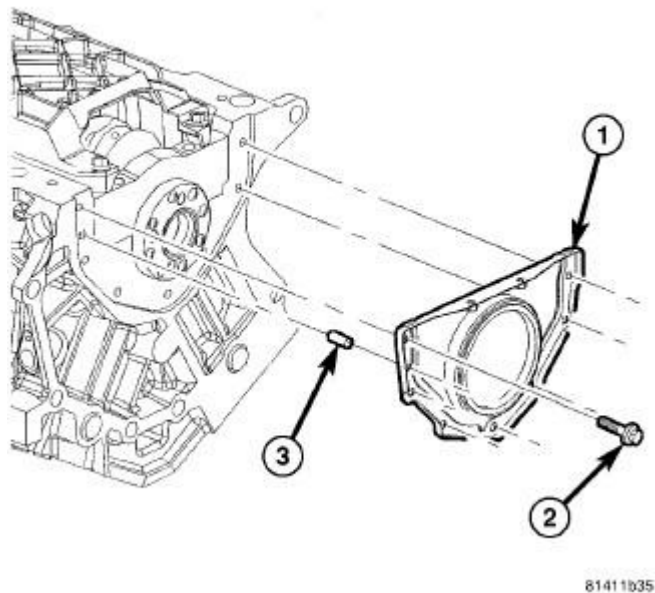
REAR CRANKSHAFT OIL SEAL & RETAINER
